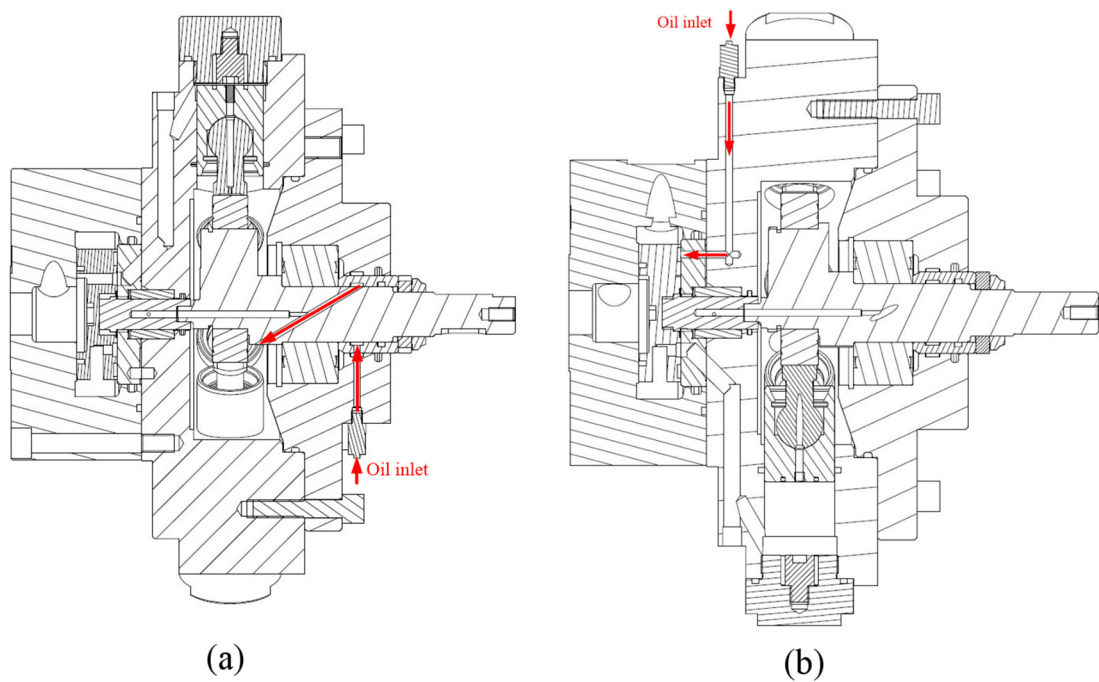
Axial section of the expander with the oil inlets for bearings and piston lubrication (a) and for the the distributor lubrication (b).
